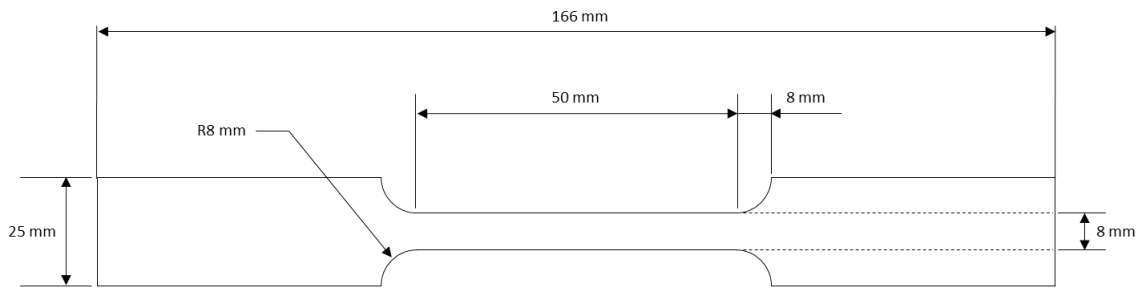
Tension test specimen dimension used at QS and elevated loading rates.
